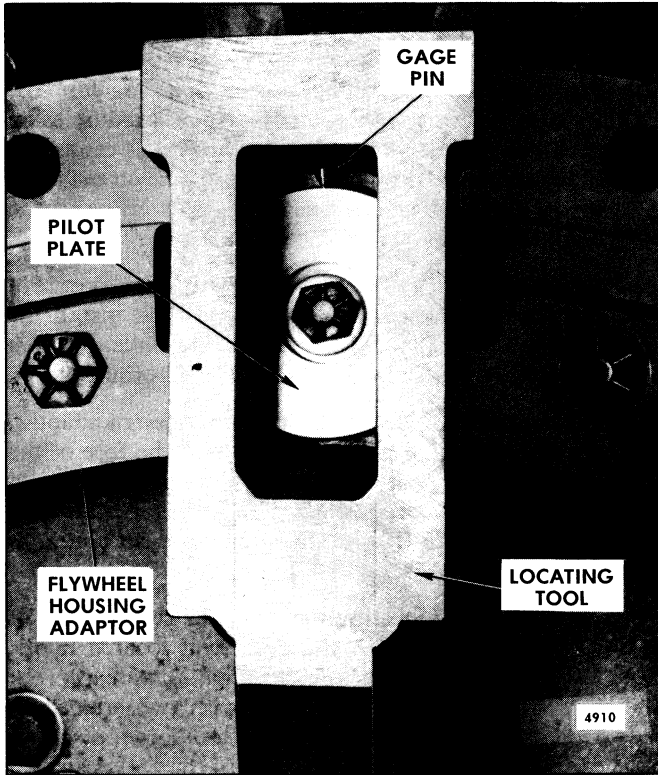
Pilot Plate in Position Against Gage Pin (Former Adaptor)
